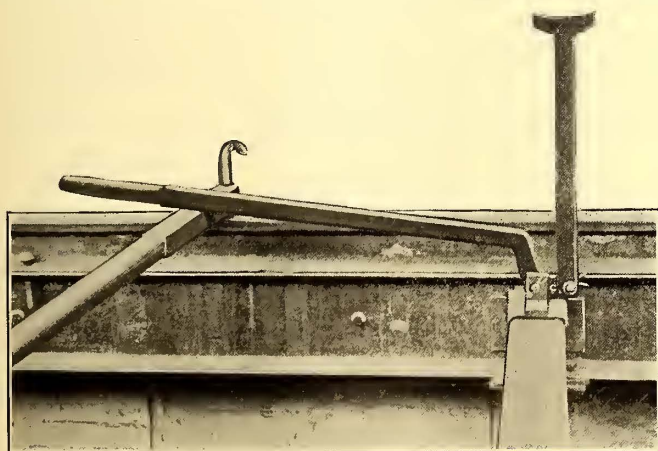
APPARATUS FOR TESTING ARMATURE BEARINGS
